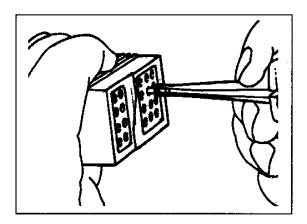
Snap Tool Over Wire of Terminal to be Removed
